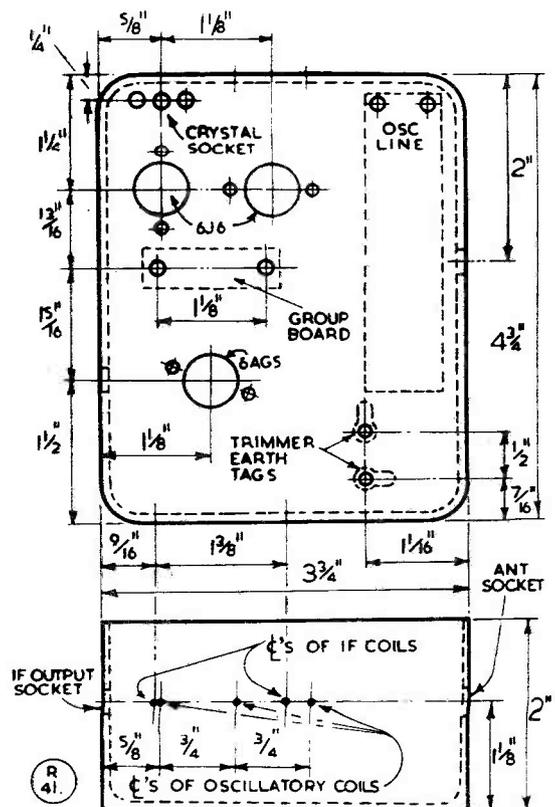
Drilling detail and dimensions for mounting box for the G2DD Converter. It can be one of the standard Eddystone shapes.
